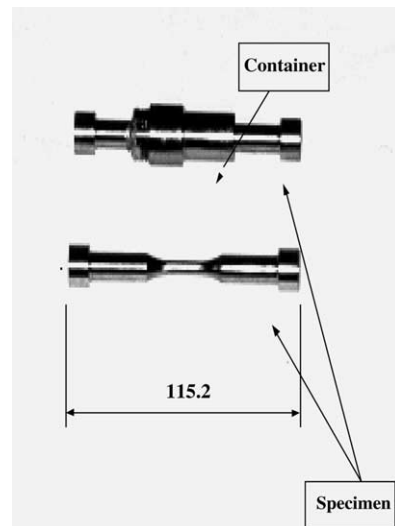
Mercury container mounted to a UT button-end fatigue specimen.
